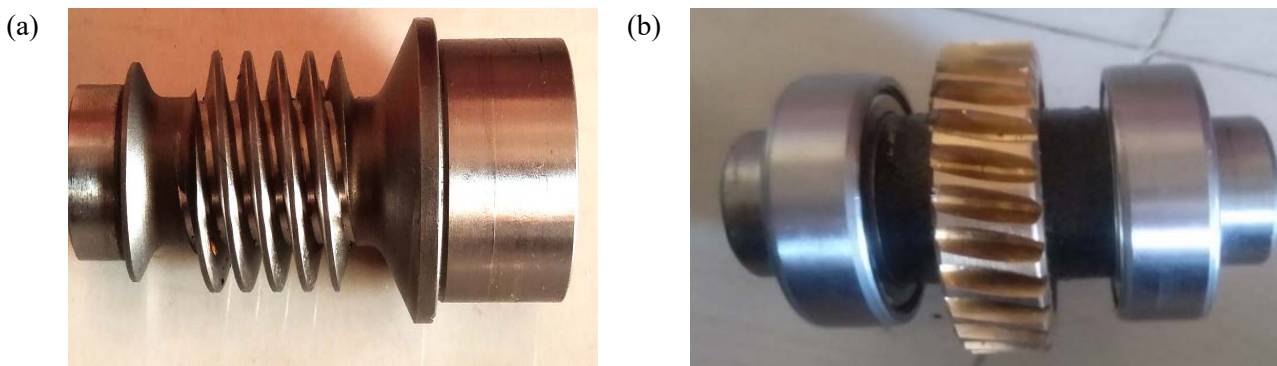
Internal parts of worm gearbox: (a) worm, (b) worm wheel.
